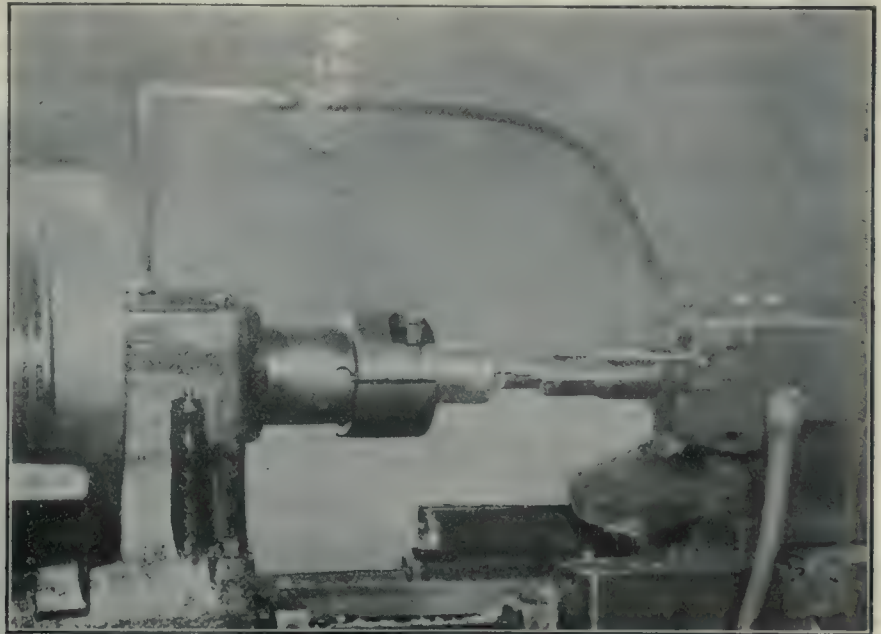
BORING 18-PDR. SHRAPNEL SHELLS ON A MACGREGOR-GOURLAY ENGINE LATHE.
